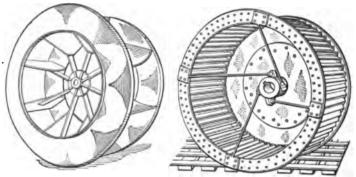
Wheel of straight-blade fan. Wheel of multi-blade fan.
